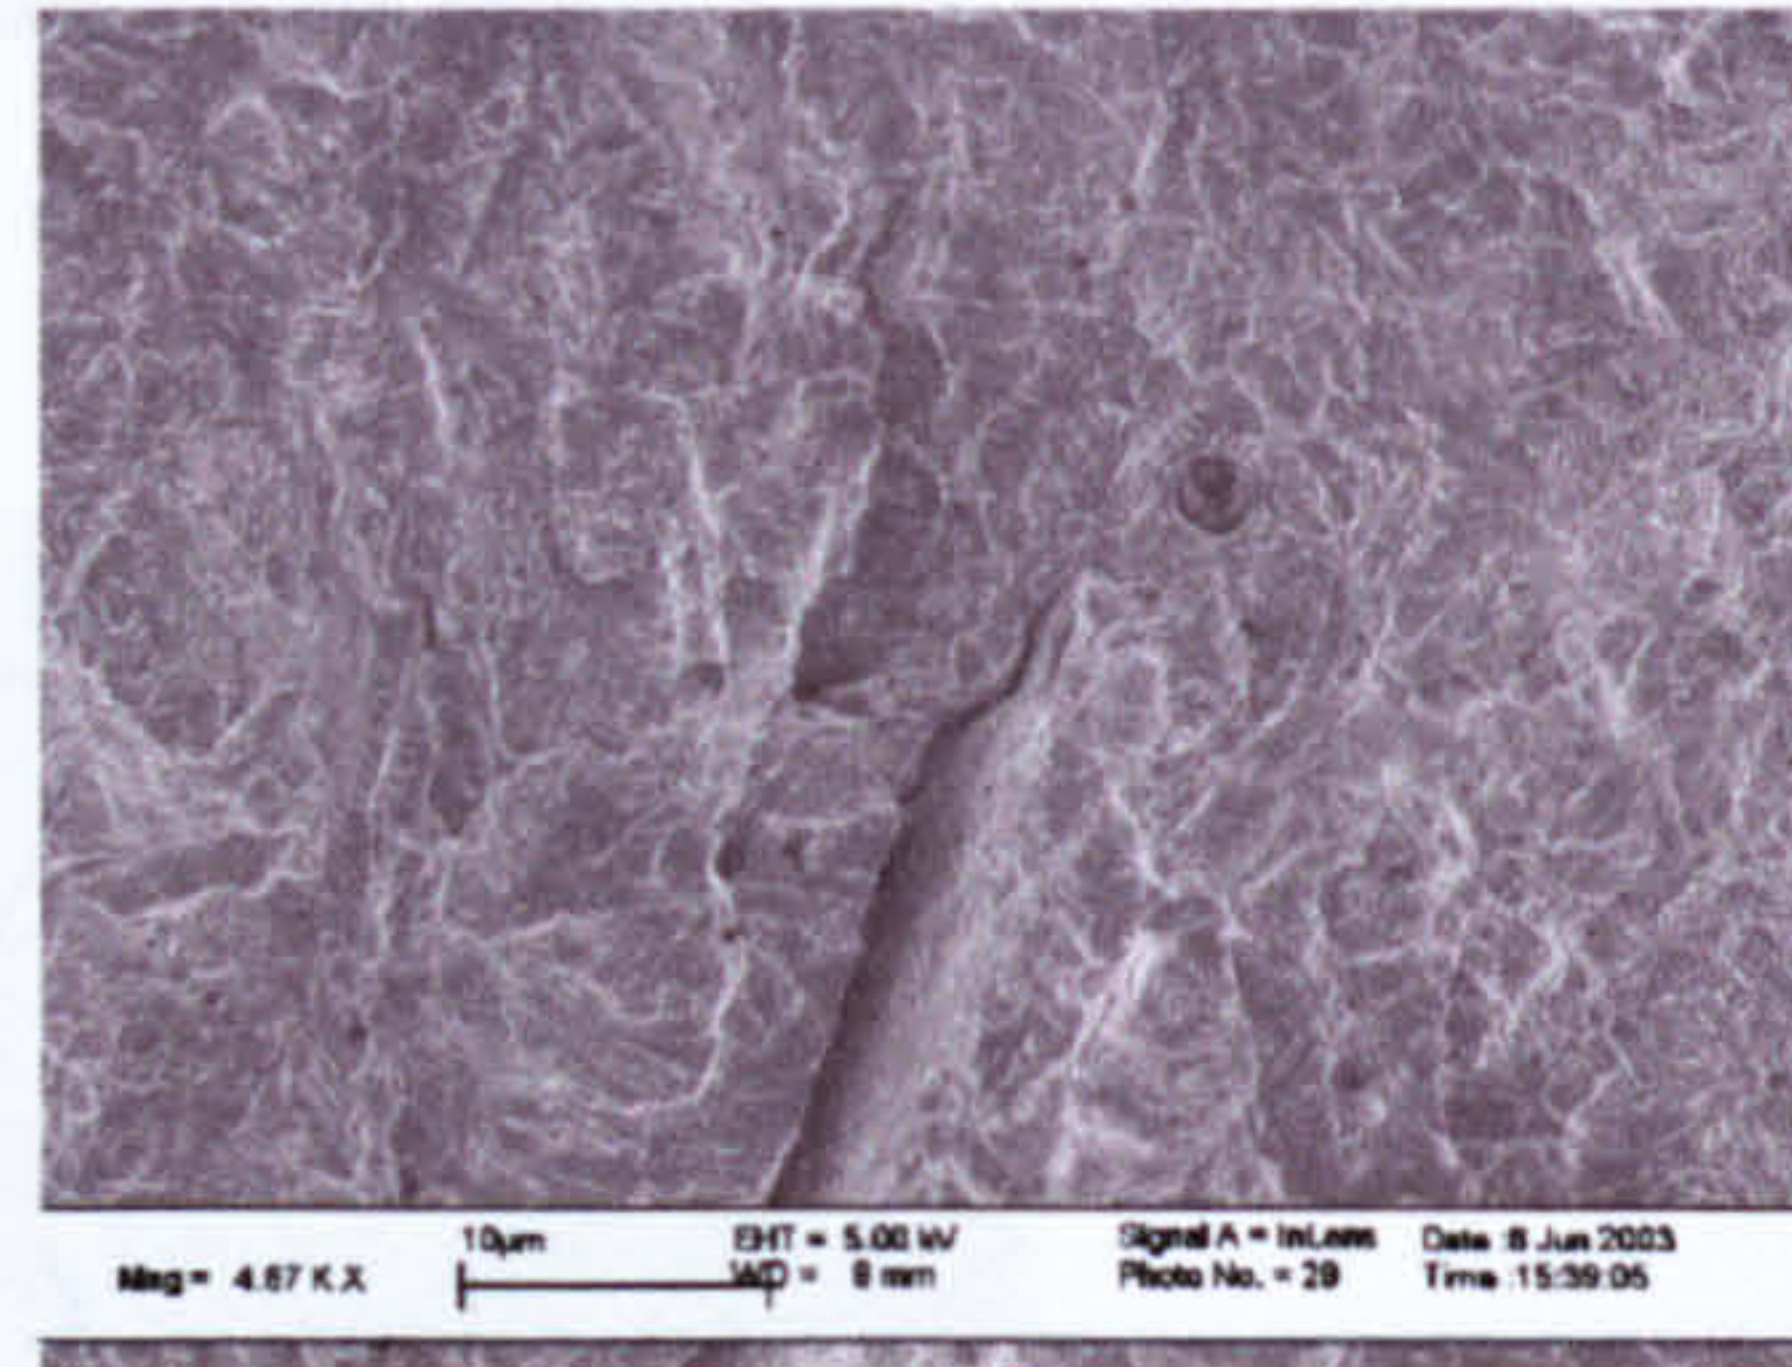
Fracture surface of the CWX361 weld metal with 2.95 mL/100 g of diffusible hydrogen, showing mixture of QC and MVC fracture micromechanism.
